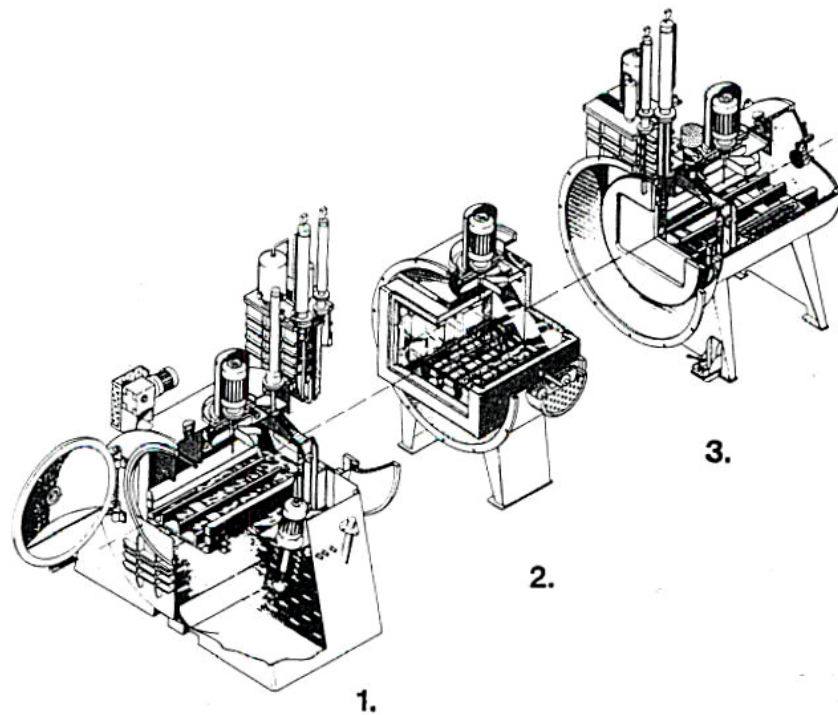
Cross-sectioned view of vacuum transfer furnace [45].
